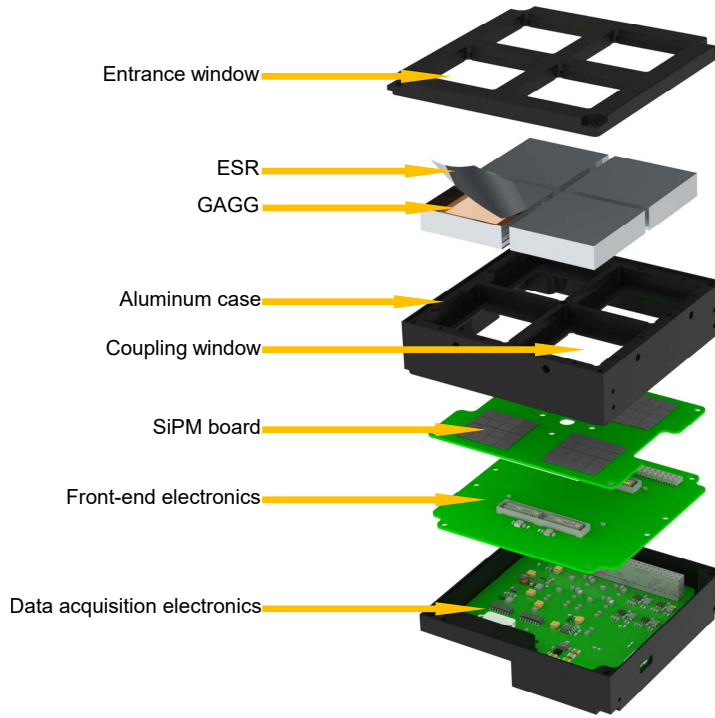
Exploded view of GRID detector. Details about GRID instrument design could be found in [23].
